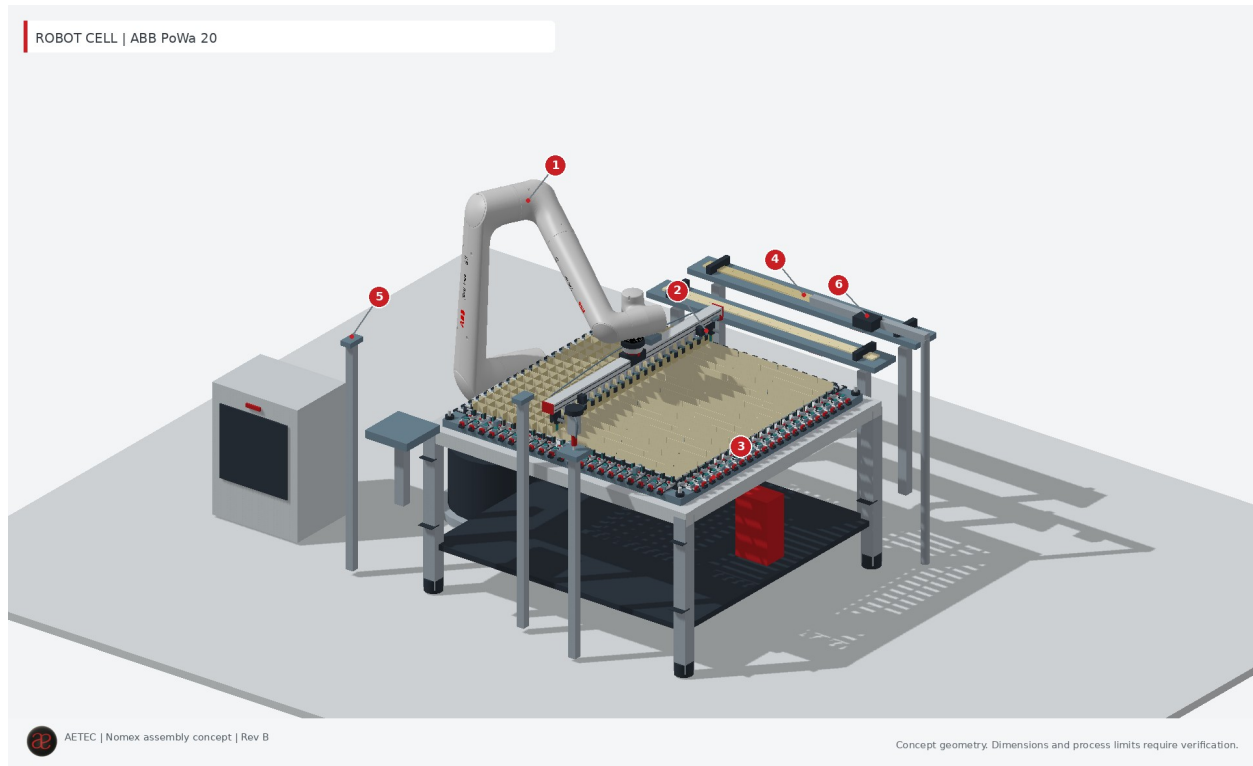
1 Robot and pedestal; 2 handling tool; 3 perimeter clamps; 4 strip magazines; 5 tool rack; 6 vision head.
